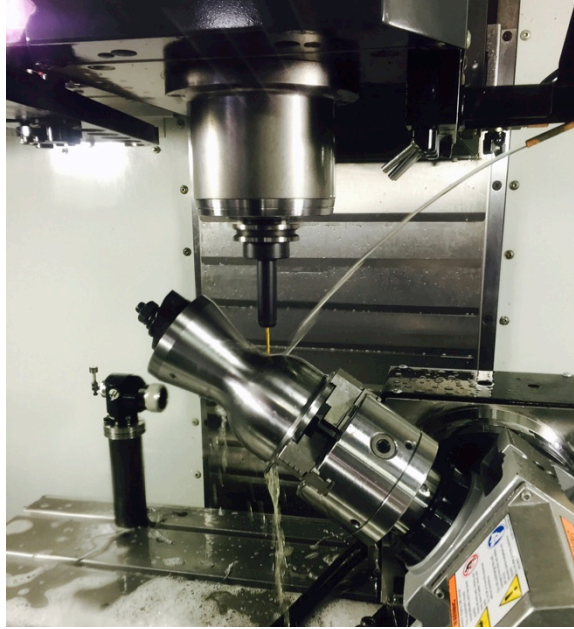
Pilot drilling thermocouple plug holes in the 4:1 nozzle on a 5-axis Haas VF-2.
